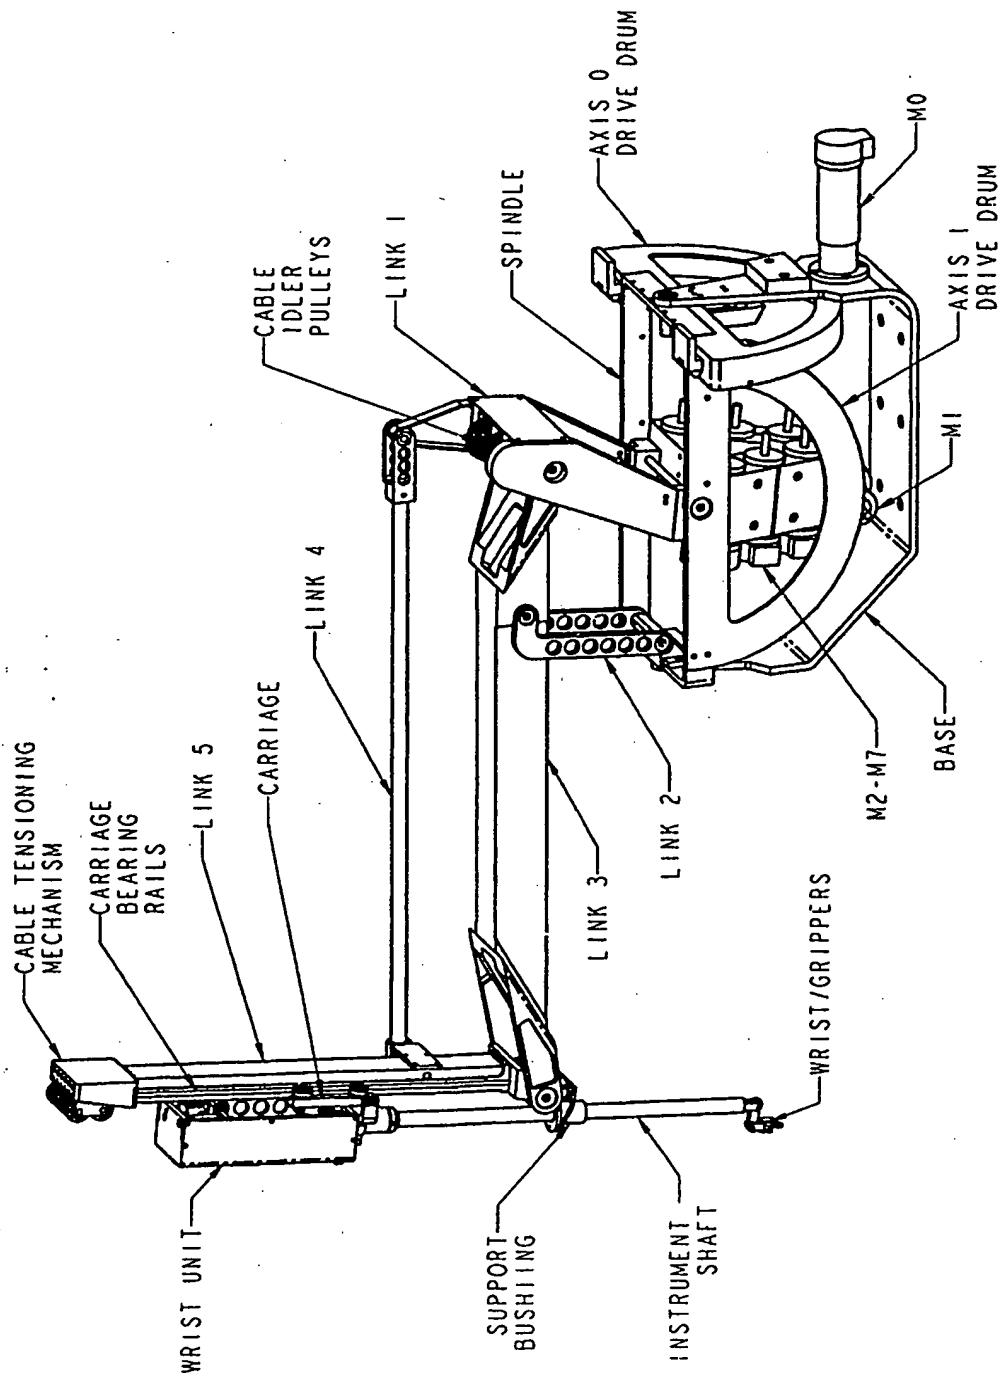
The Black Falcon consists of a counterbalanced base unit which carries all the motors for the system. A vertical carriage carries a detachable wrist unit which carries the end-effector.
